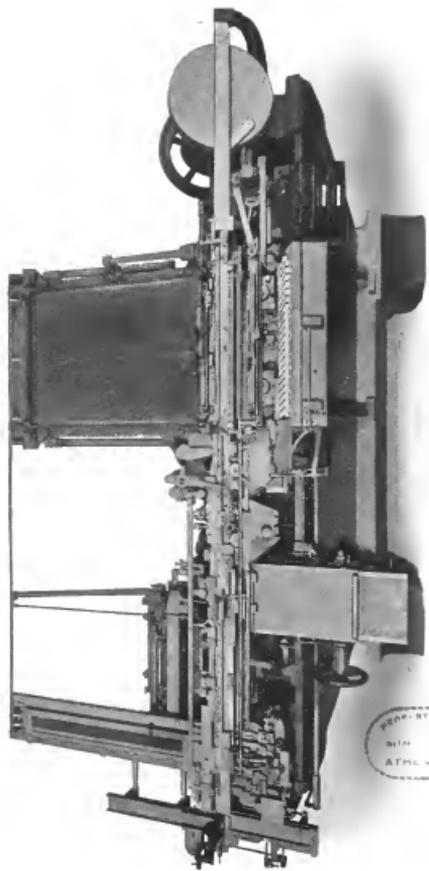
Paige composing, line-justifying, and disproofing machine; general view.
